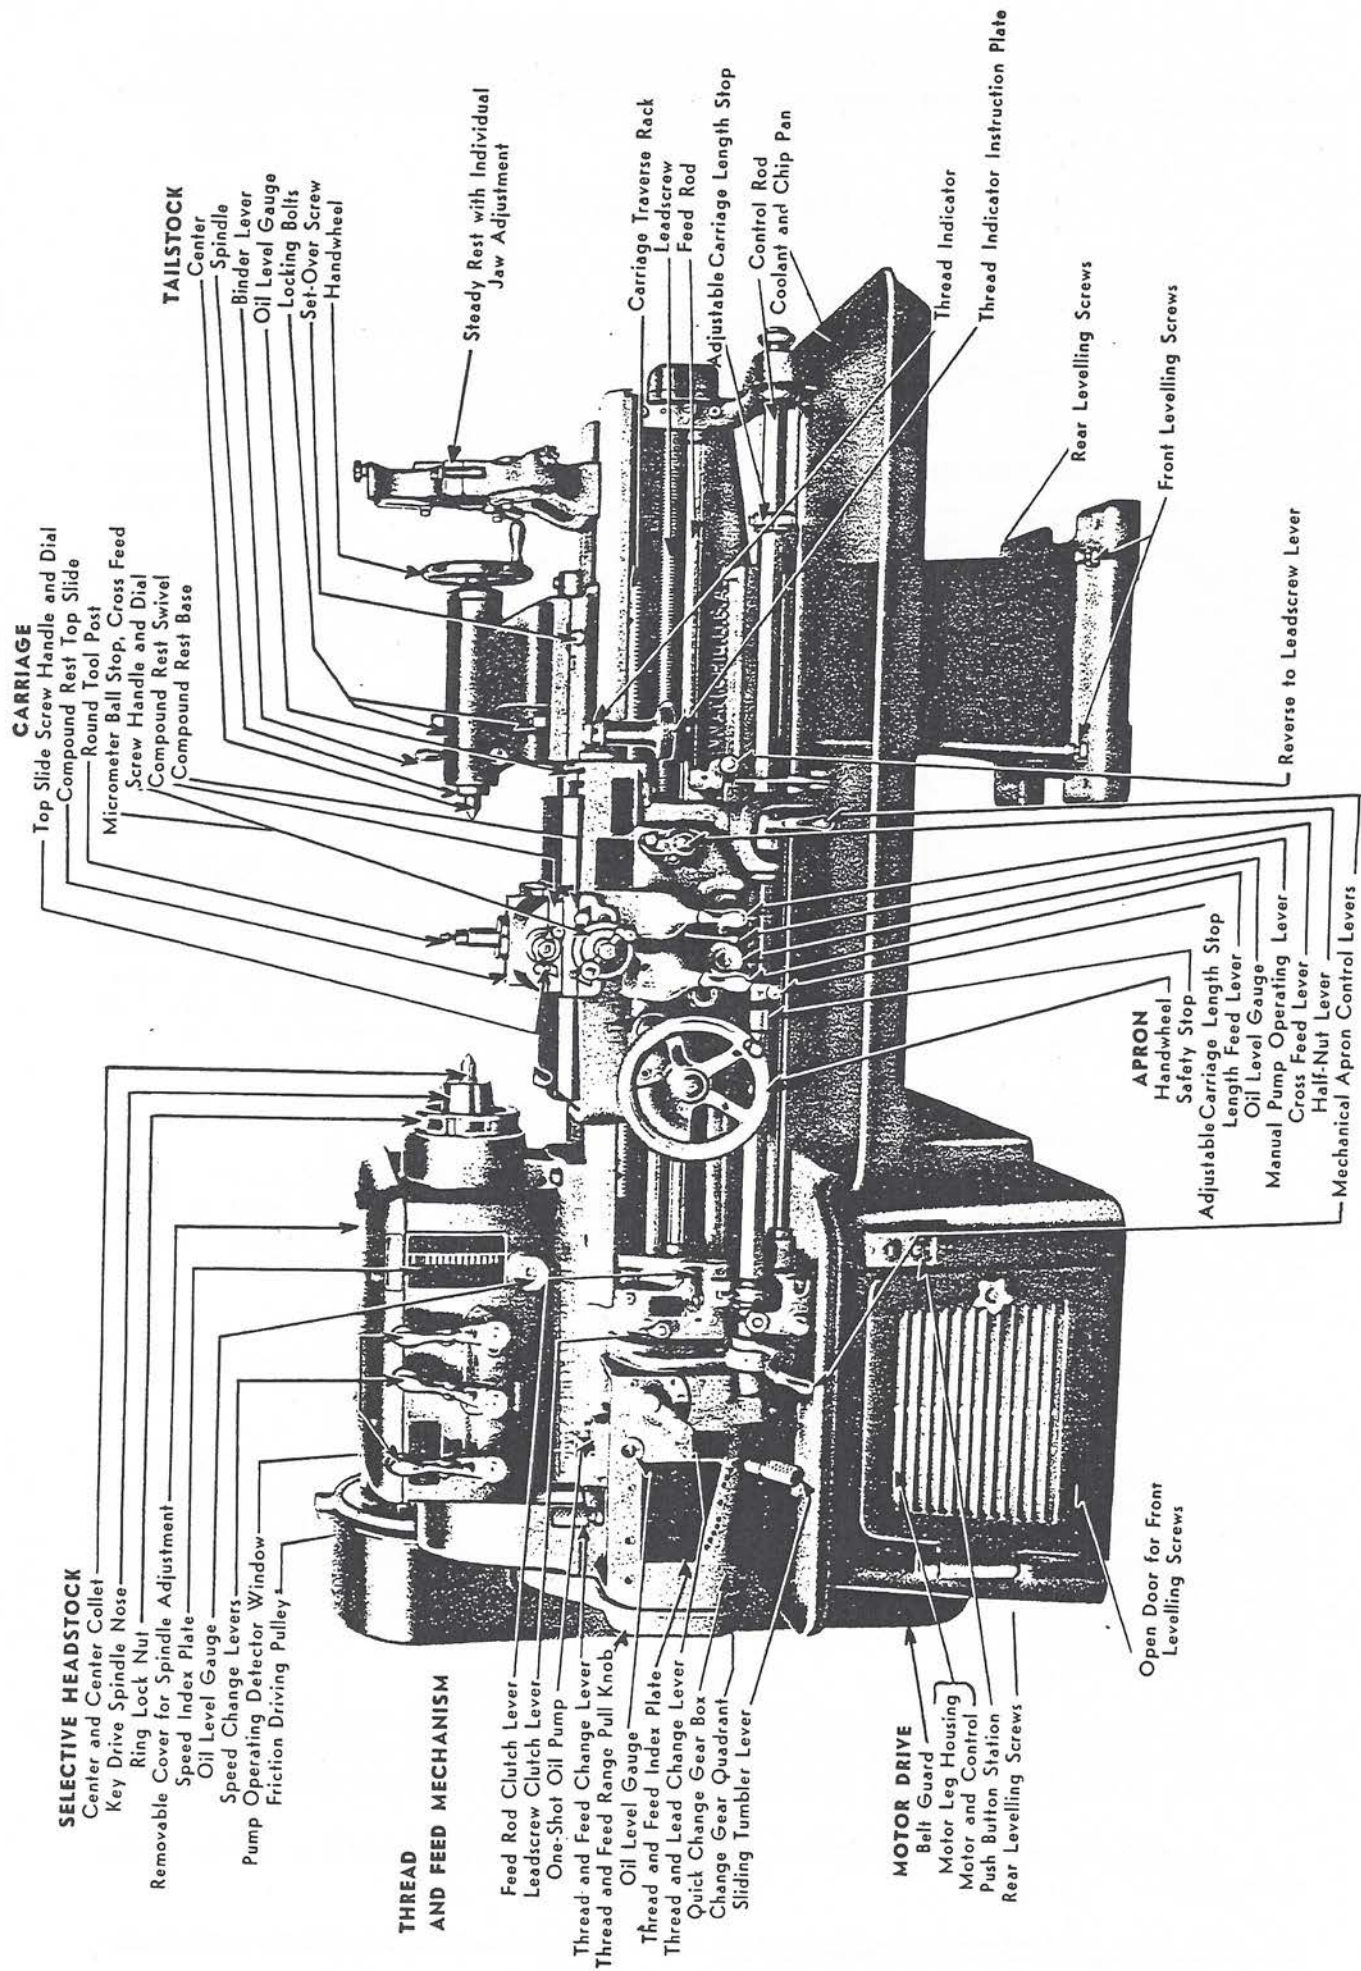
Selective Head Lathe With Reverse To Leadscrew
